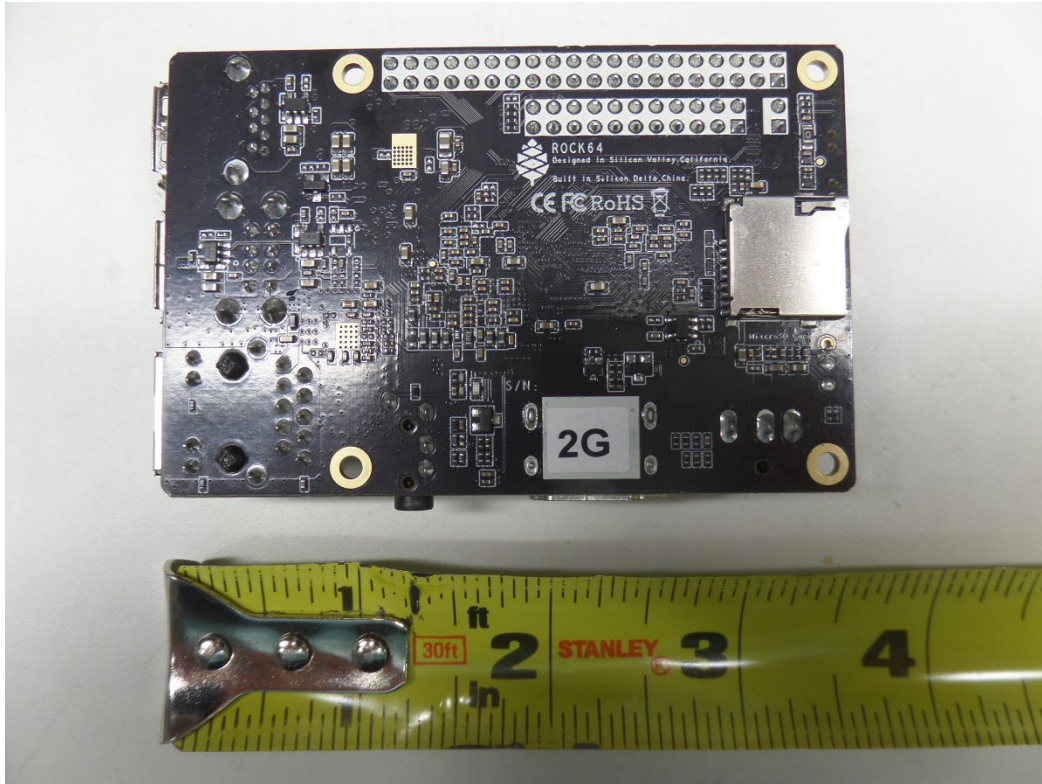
NG12 PRI/PAB RF PED ROCK 64 BOARD BOTTOM SIDE
